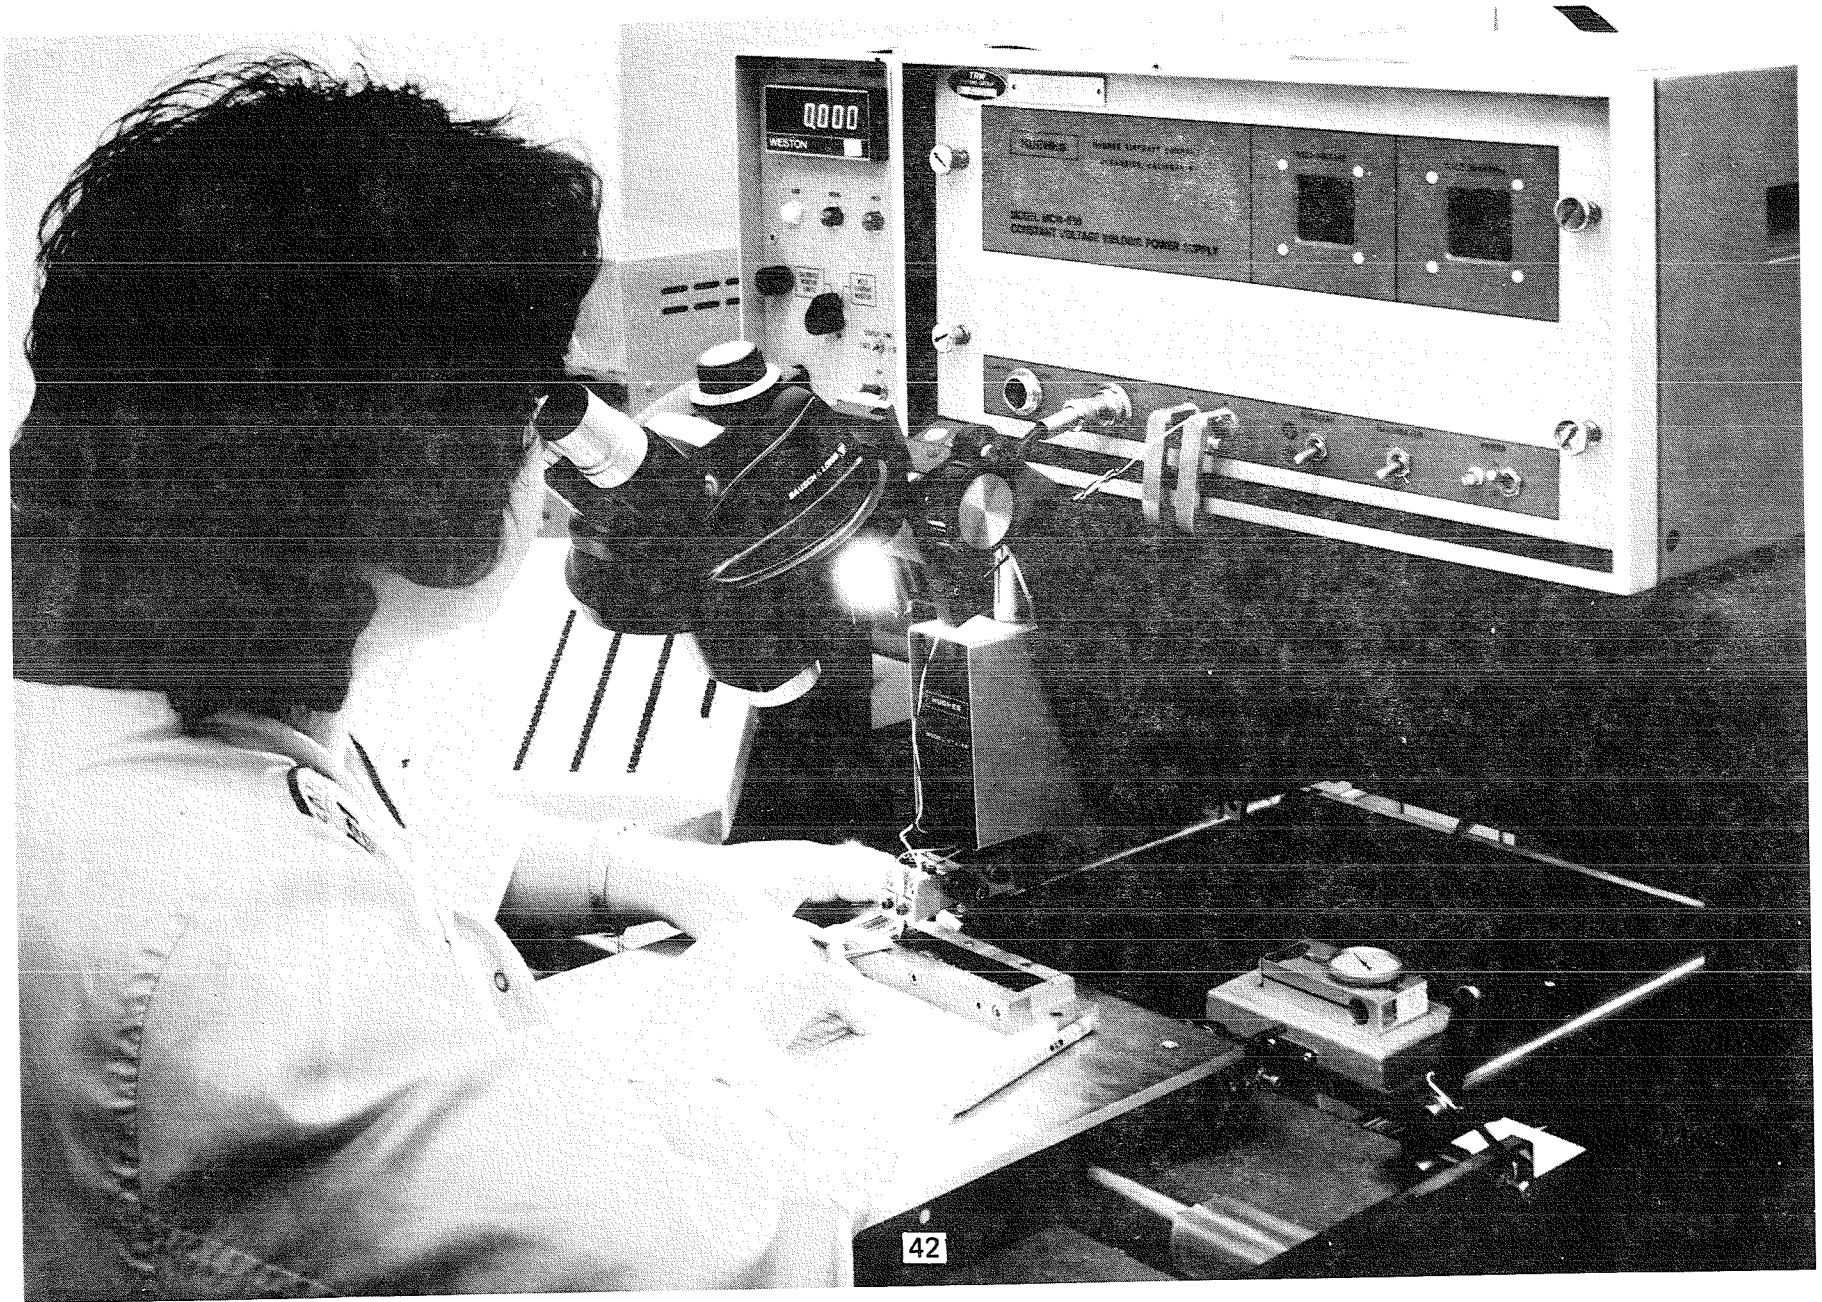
Weld Station Used for Welding Interconnects to 50- $\mu$ m Thick Solar Cells
